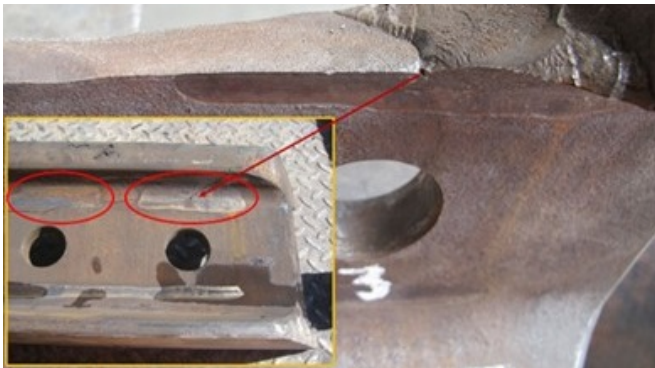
Location of final fracture above bolt hole 3. Red ovals denote surface fatigue caused by bearing on the casting support tabs.
